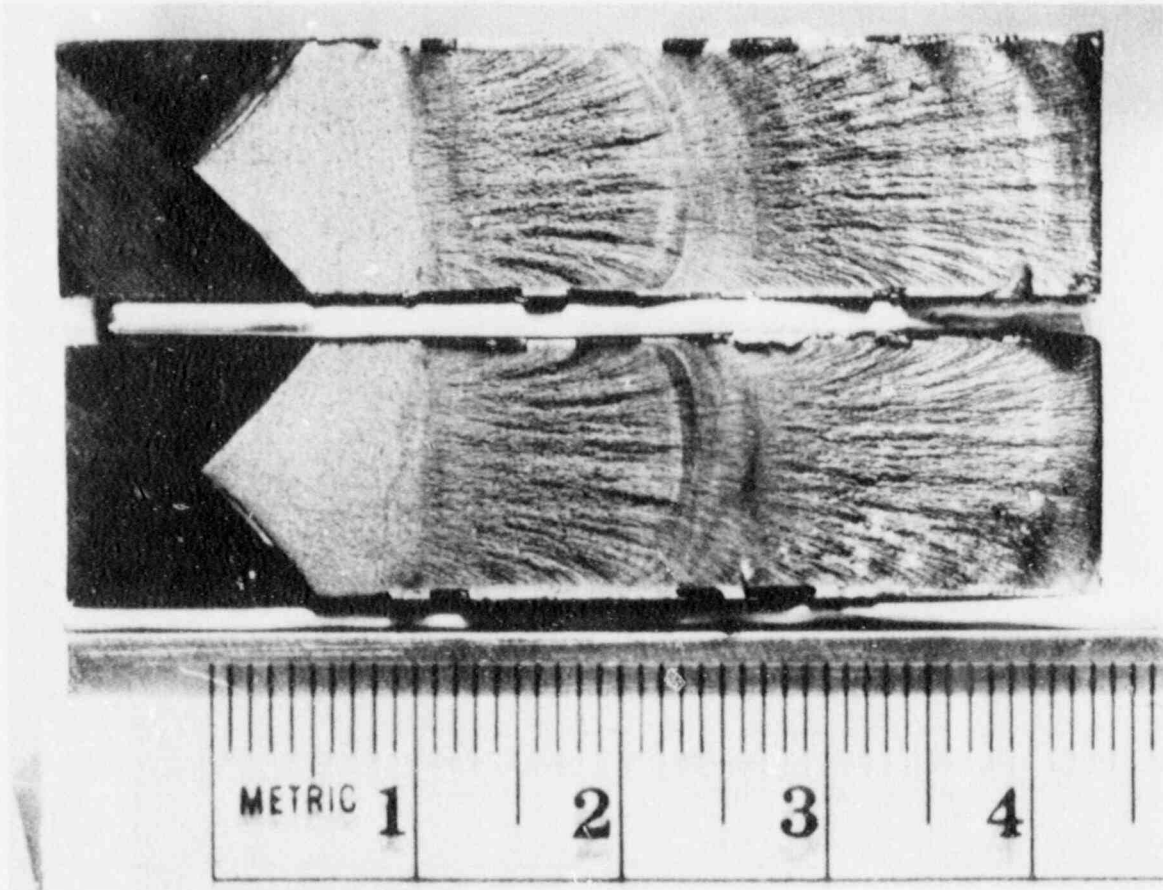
Fracture surface for 4340 short-bar specimen.
